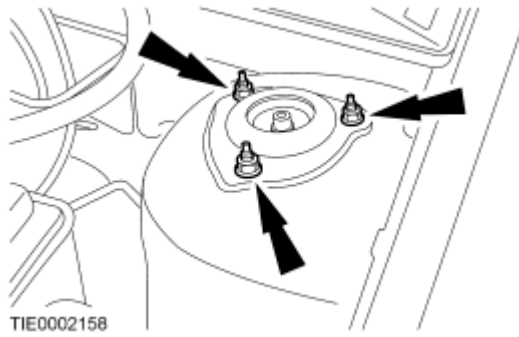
Locating LH Strut And Spring Assembly Top Mount Nuts
